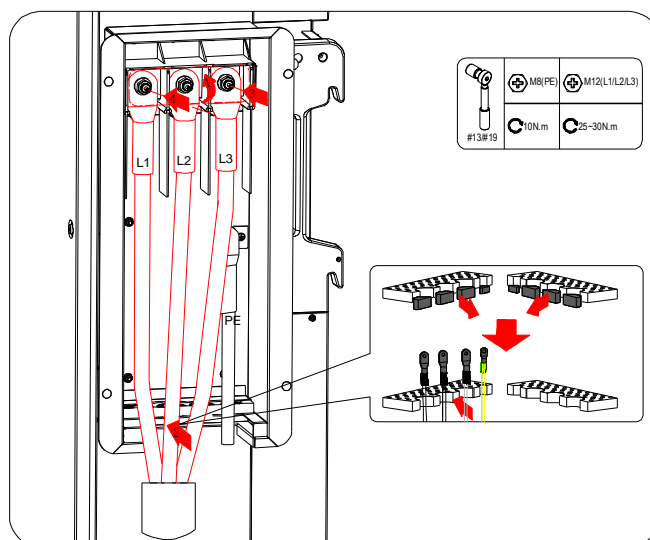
Connection of multi-core cables using single-core sealing gasket
